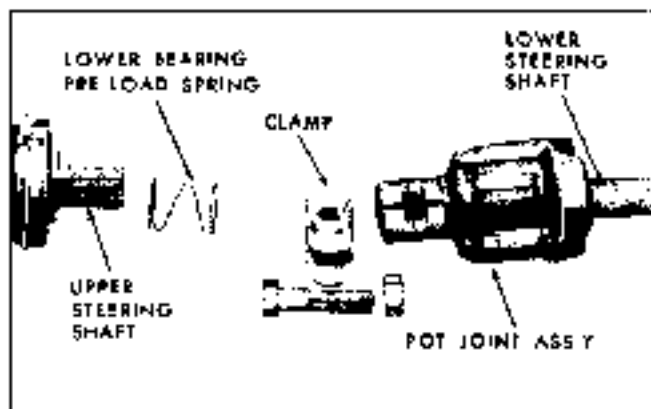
Removing Pot Joint and Lower Shaft from Upper Steering Shaft (Tempest Only)
